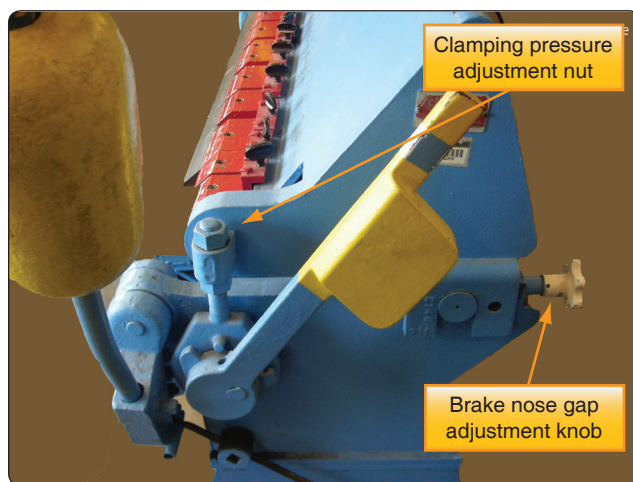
Adjust clamping pressure with the clamping pressure nut.
